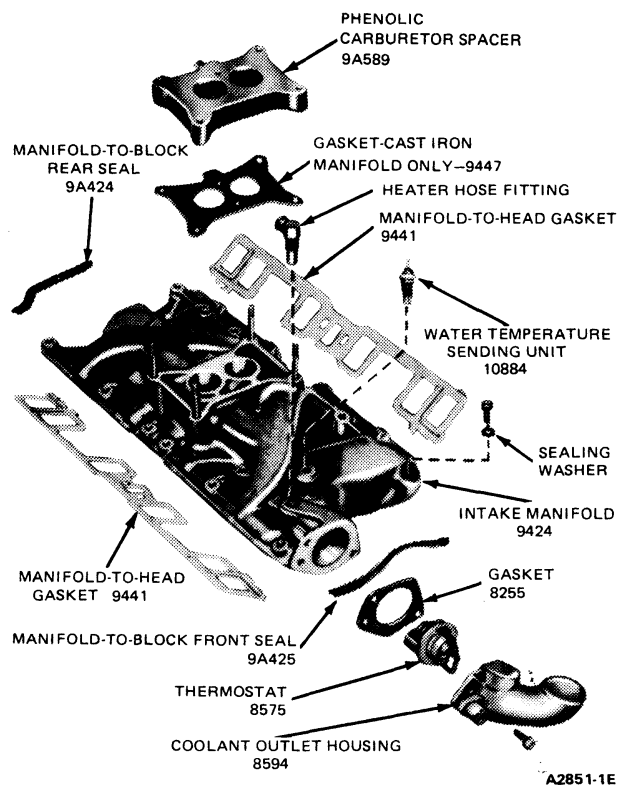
Intake Manifold Assembly—5.0L (302 CID) V-8 and 5.8L (351 CID) W-V-8
